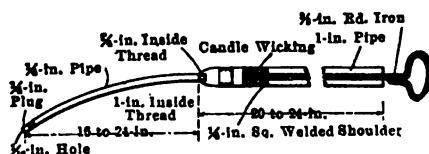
SQUIRT GUN FOR CLEANING DRILL HOLES.
